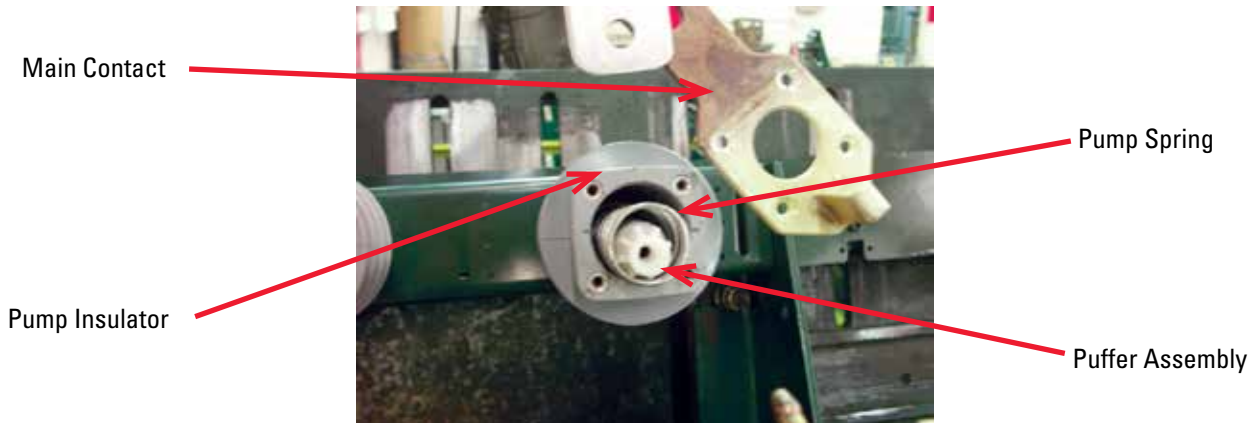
Pivot main contact off pump insulator to expose puffer assembly and pump spring.
